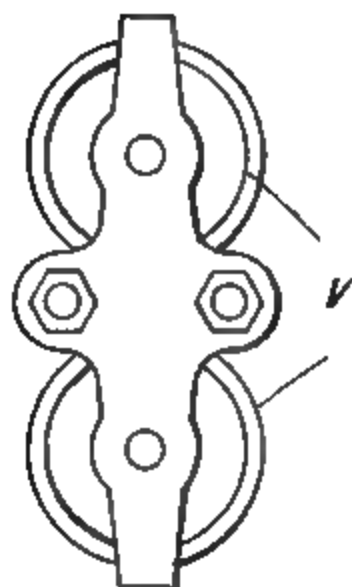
Section showing Spherical Valves used in Burnham Double-acting Pump for Thick Fluids.
